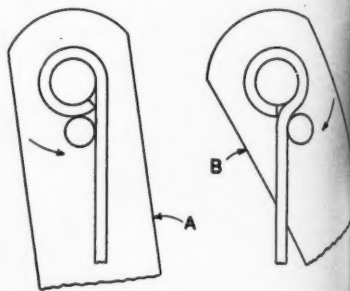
Method of Forming an Extended End. The Tool is a Piece of Flat Stock in Which Two Pins Have been Driven
